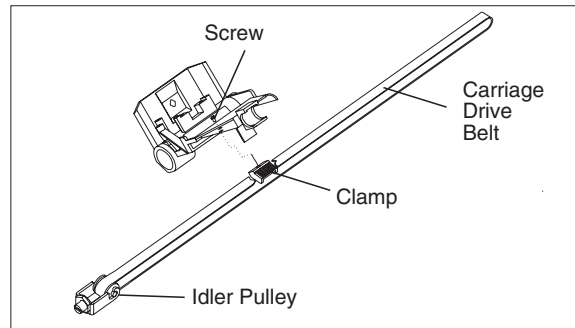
Carriage Drive Belt Clamp. (Viewed From Top)
